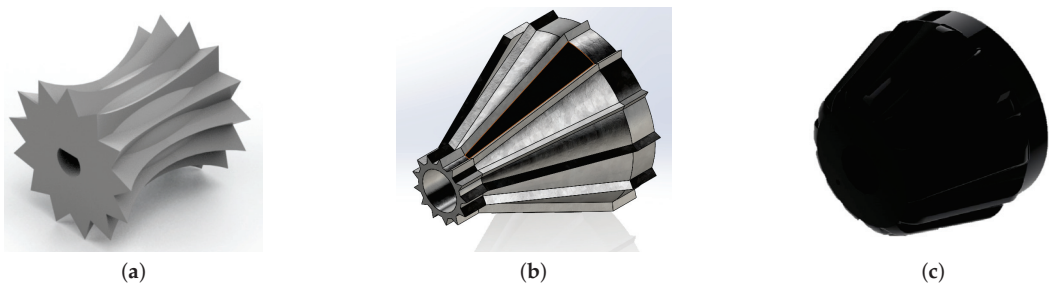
Gear design concepts: (a) first gear attempt, (b) idealized conic gear and (c) final gear.
